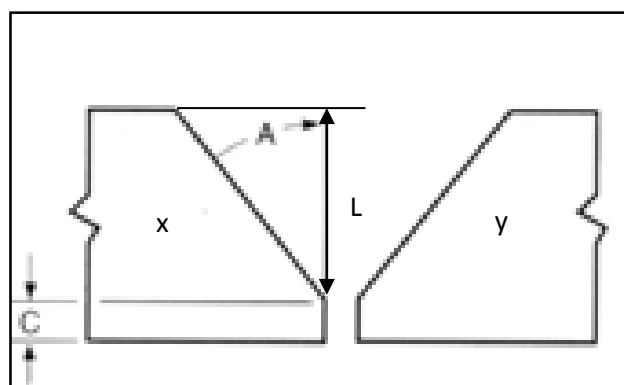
Weld design of 'V' groove [26]
